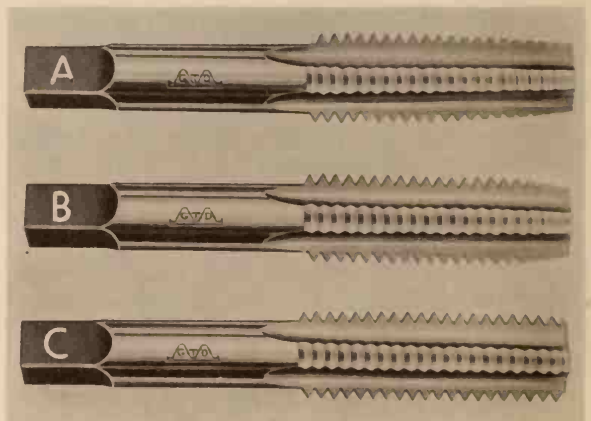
Set of taps. (A) Taper; (B) Plug; (C) Bottoming.
